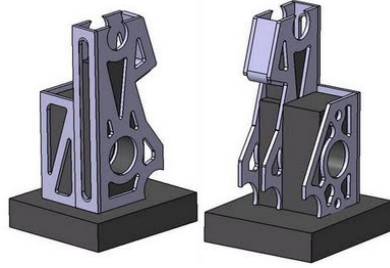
Welding fixture for right side mount (image credit Jesus Meraz)
